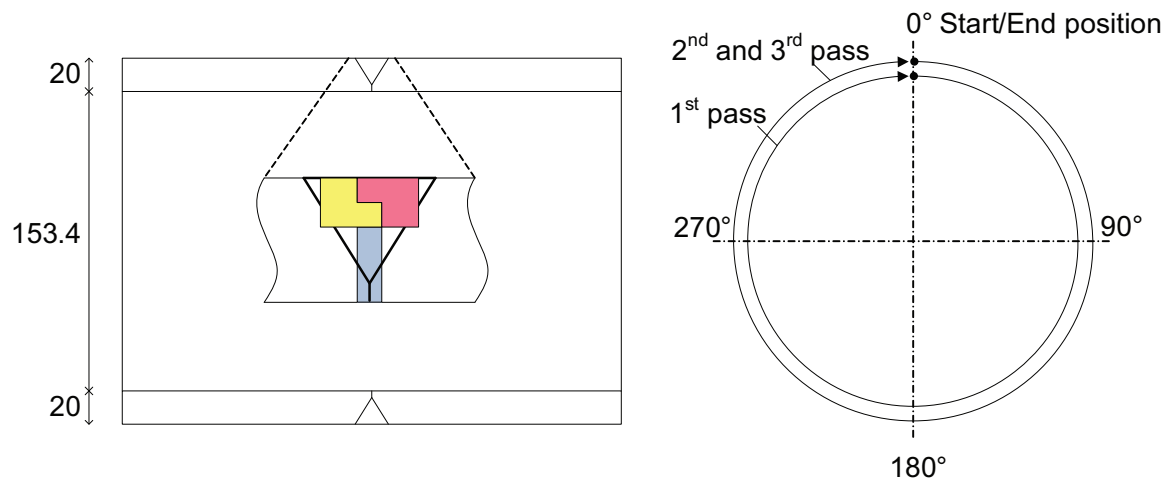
Dimensions of the welded tube, shape of the weld and welding direction of each pass
